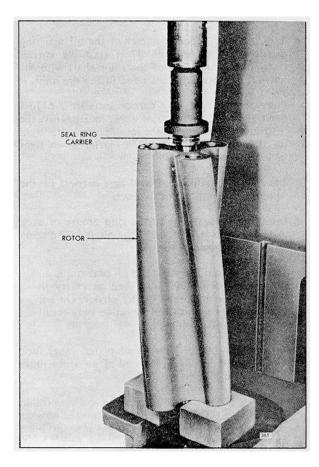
Installing Oil Seal Ring Carrier on Blower Rotor Shaft with Tool J 6270-4
